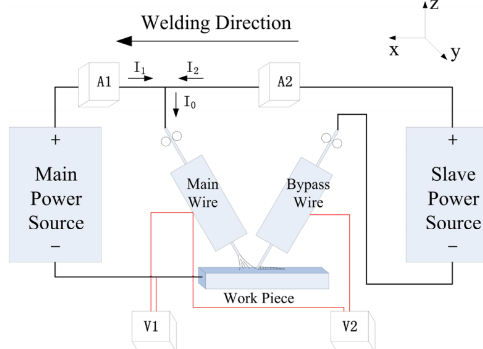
Schematic drawing of the Double Electrode Gas Metal Arc Welding process. From Wei et al. (2015).
